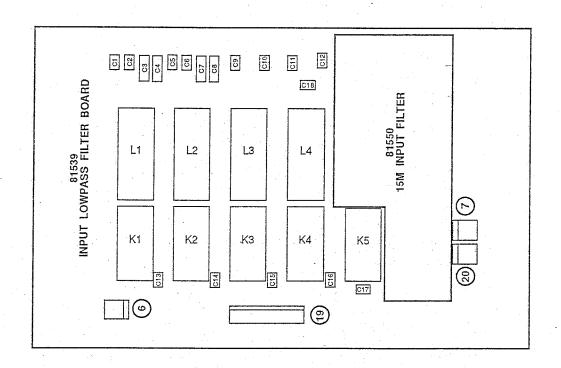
81539 INPUT LOW PASS FILTER BOARD COMPONENT LAYOUT
